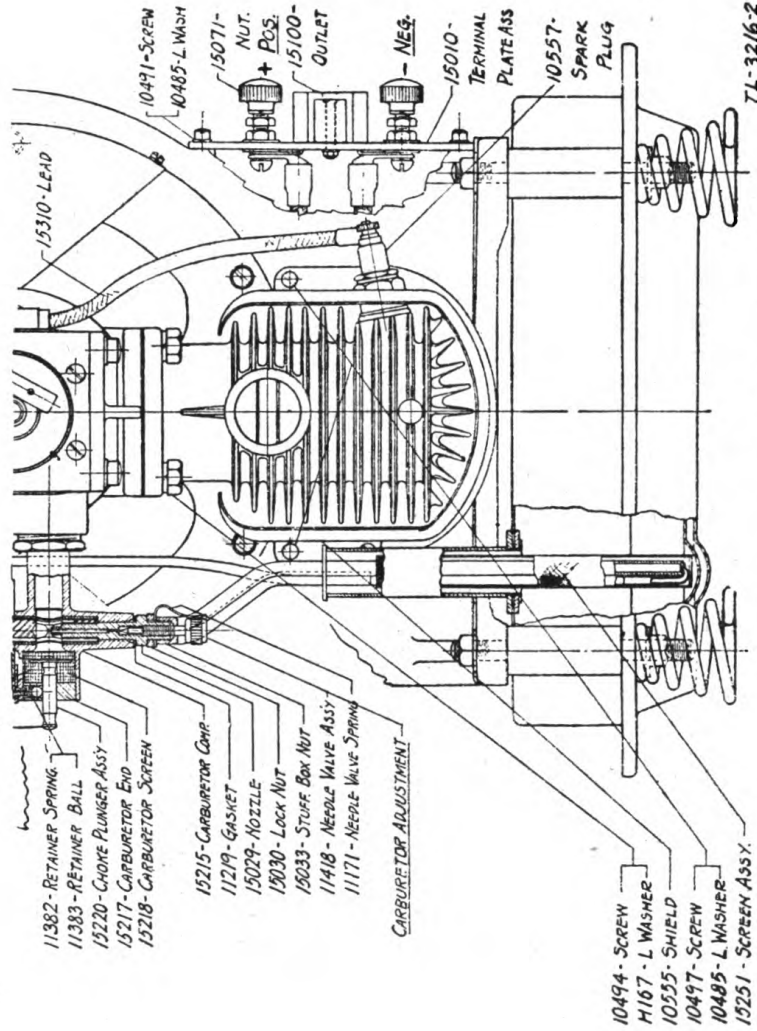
Power unit PE-HA-43—sectional view—Continued.
